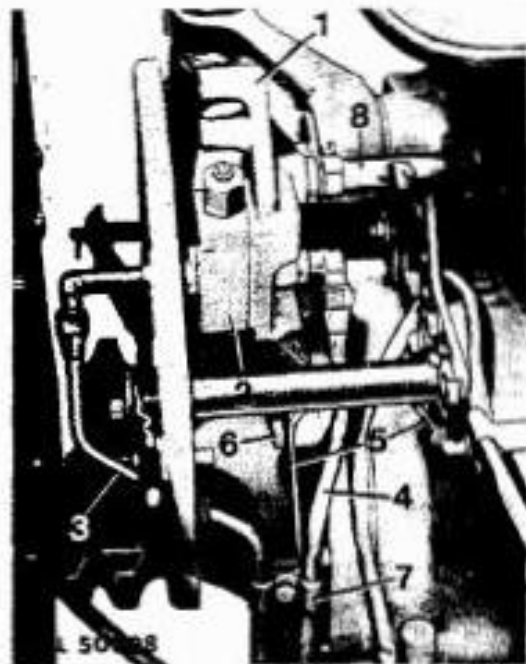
Oil Manifold and Pressure Control Valve Installed
